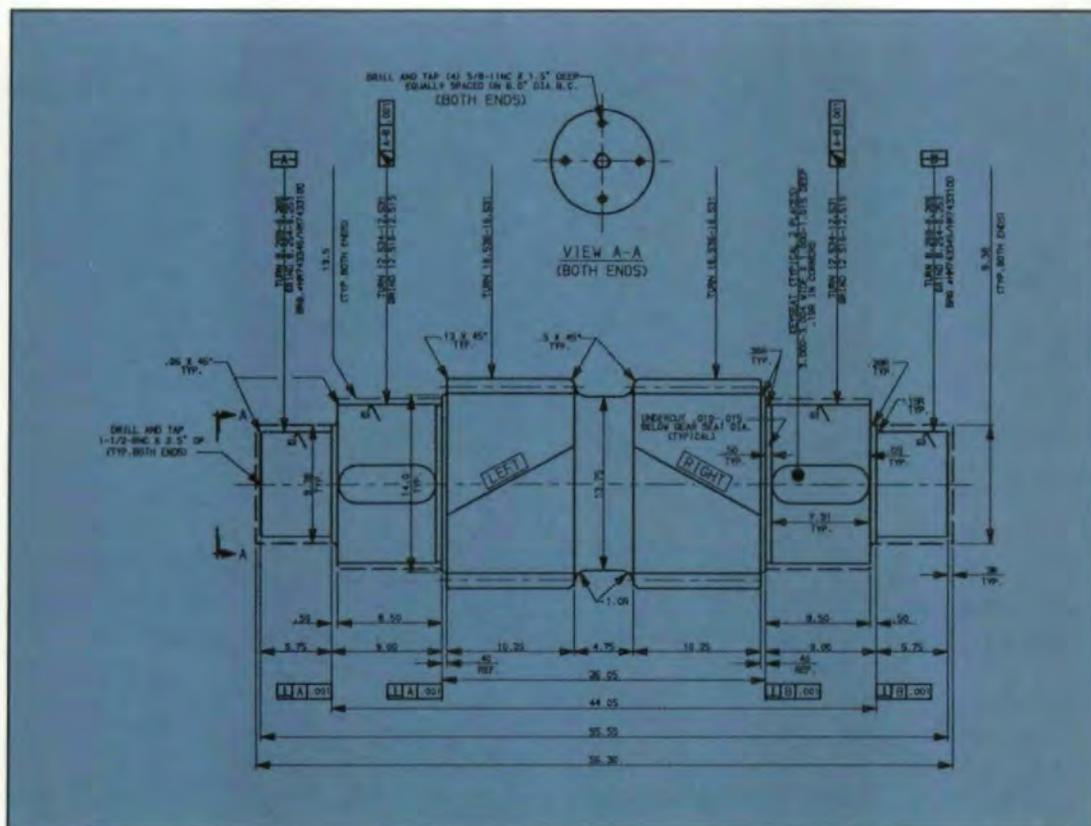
Double helical pinion shaft showing groove for grinding wheel clearance.
